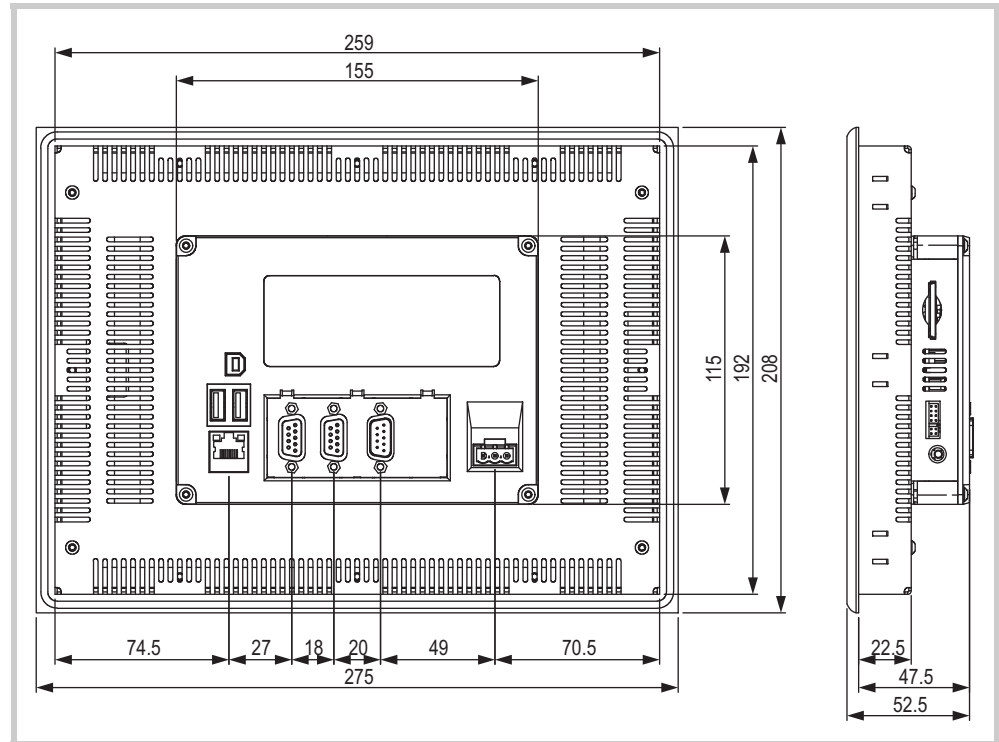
Mechanical dimensions of the 8.4" devices in mm
